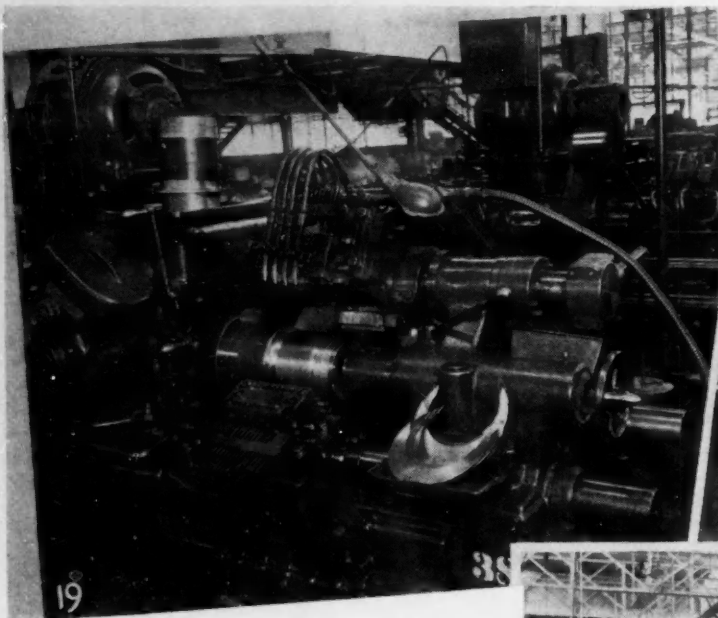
Auto Lathe for Turning Cooling Fins on Cylinder Barrels
